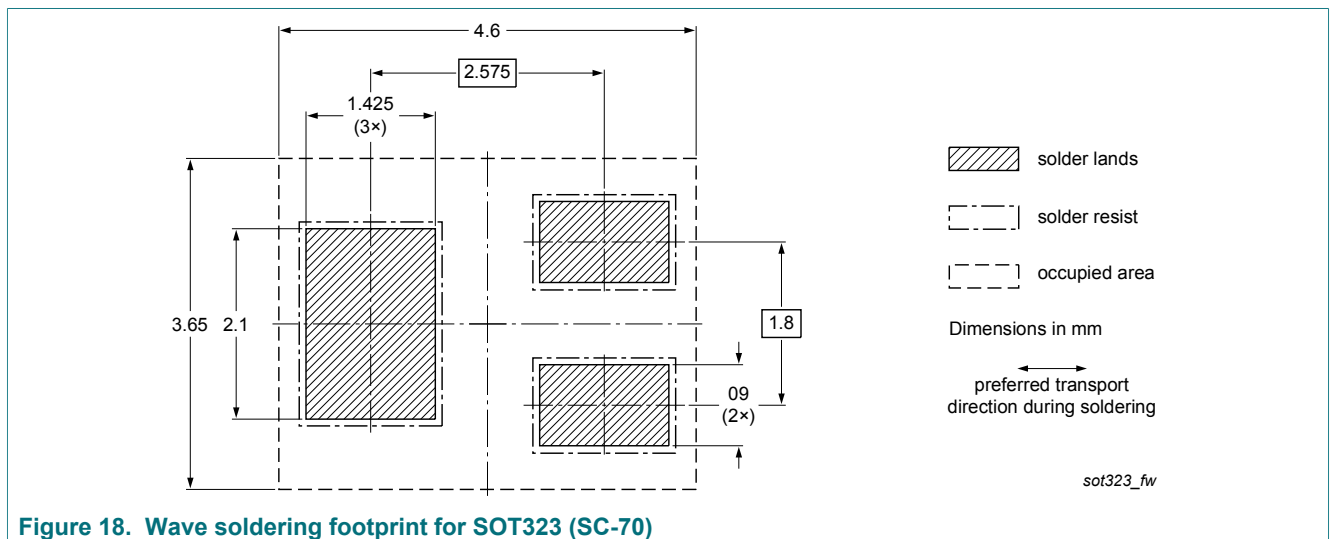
Wave soldering footprint for SOT323 (SC-70)
